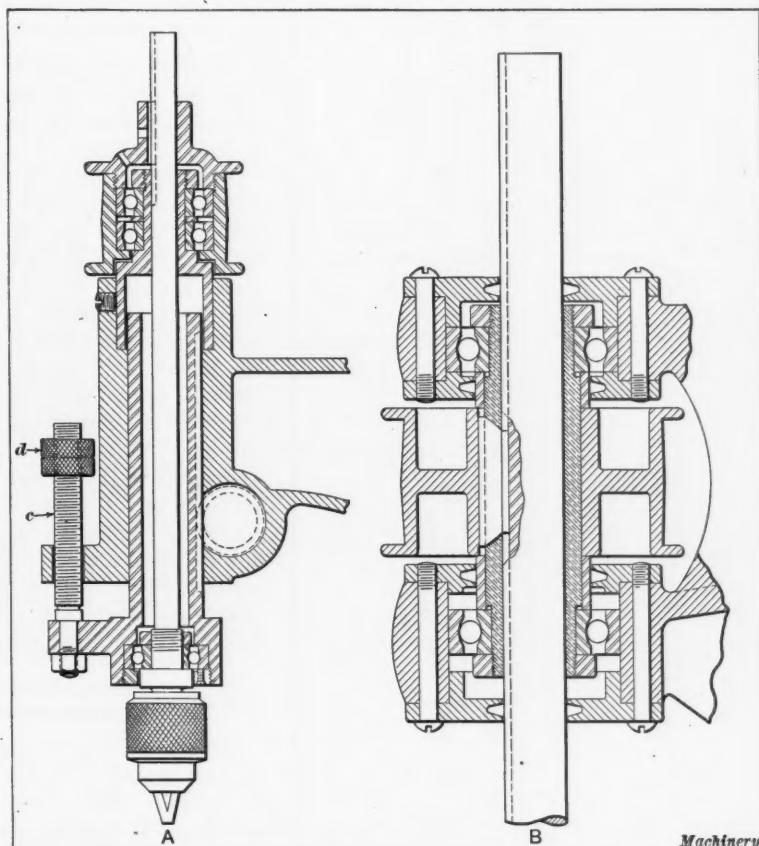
(A) Spindle which proved Successful at Speeds up to 5000 R.P.M. (B) Pulley located between Bearings
